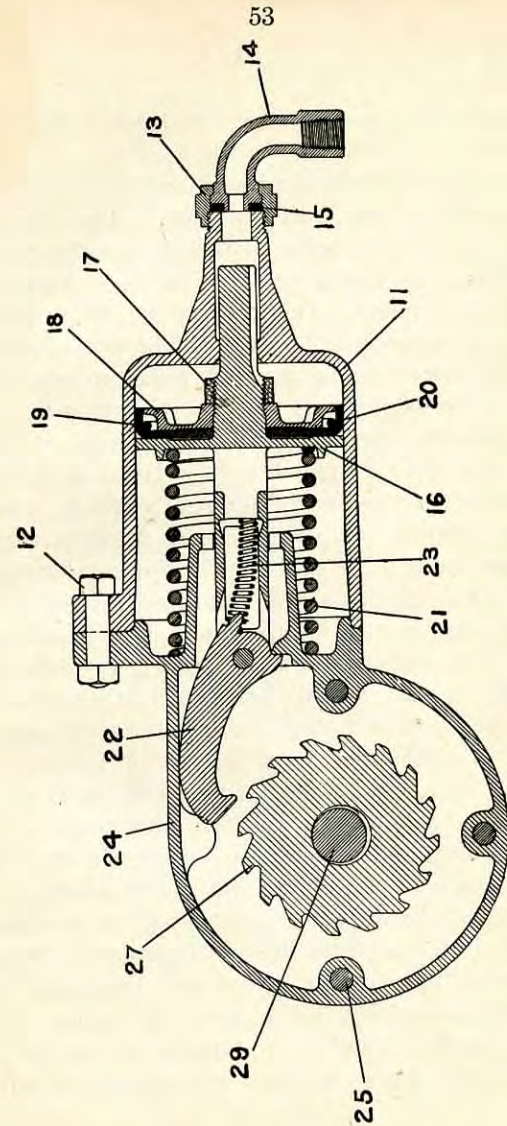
Automatic Slack Adjuster, Release Position, Slack Taken up.
